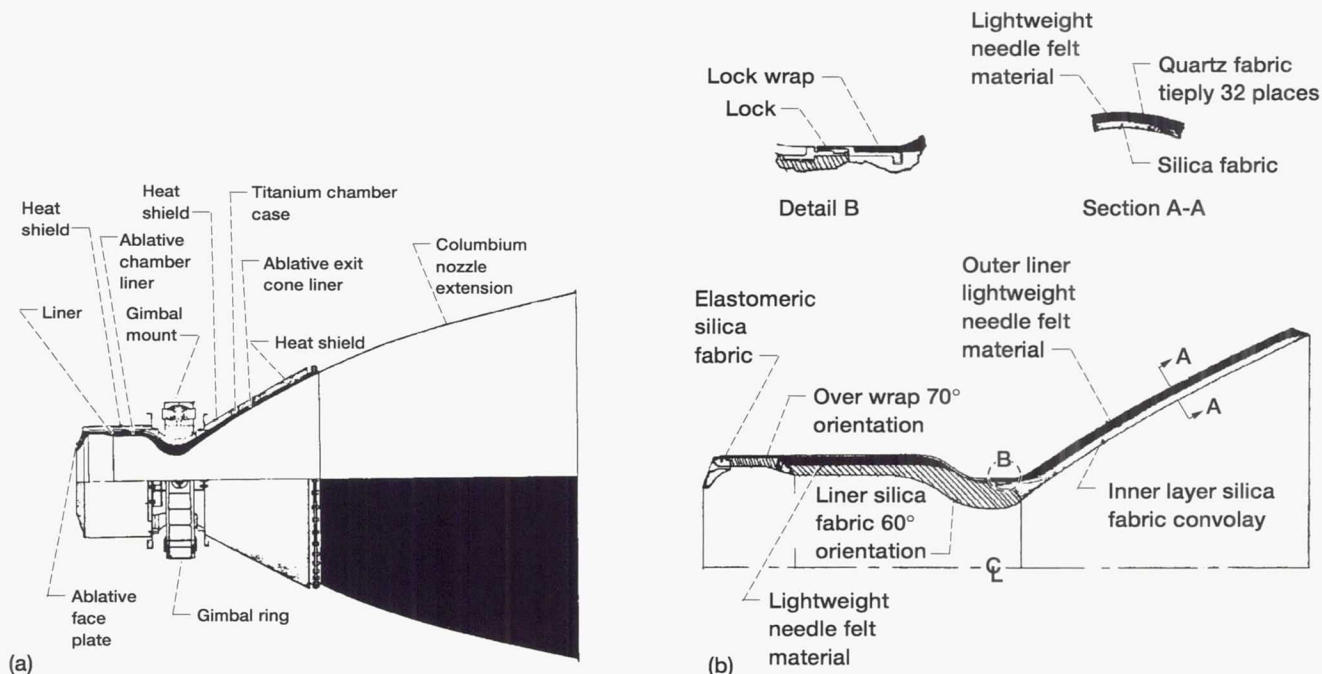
TRW lunar module descent engine. (a) Thrust chamber assembly. (b) Lightweight chamber liner. (Reference 16).
